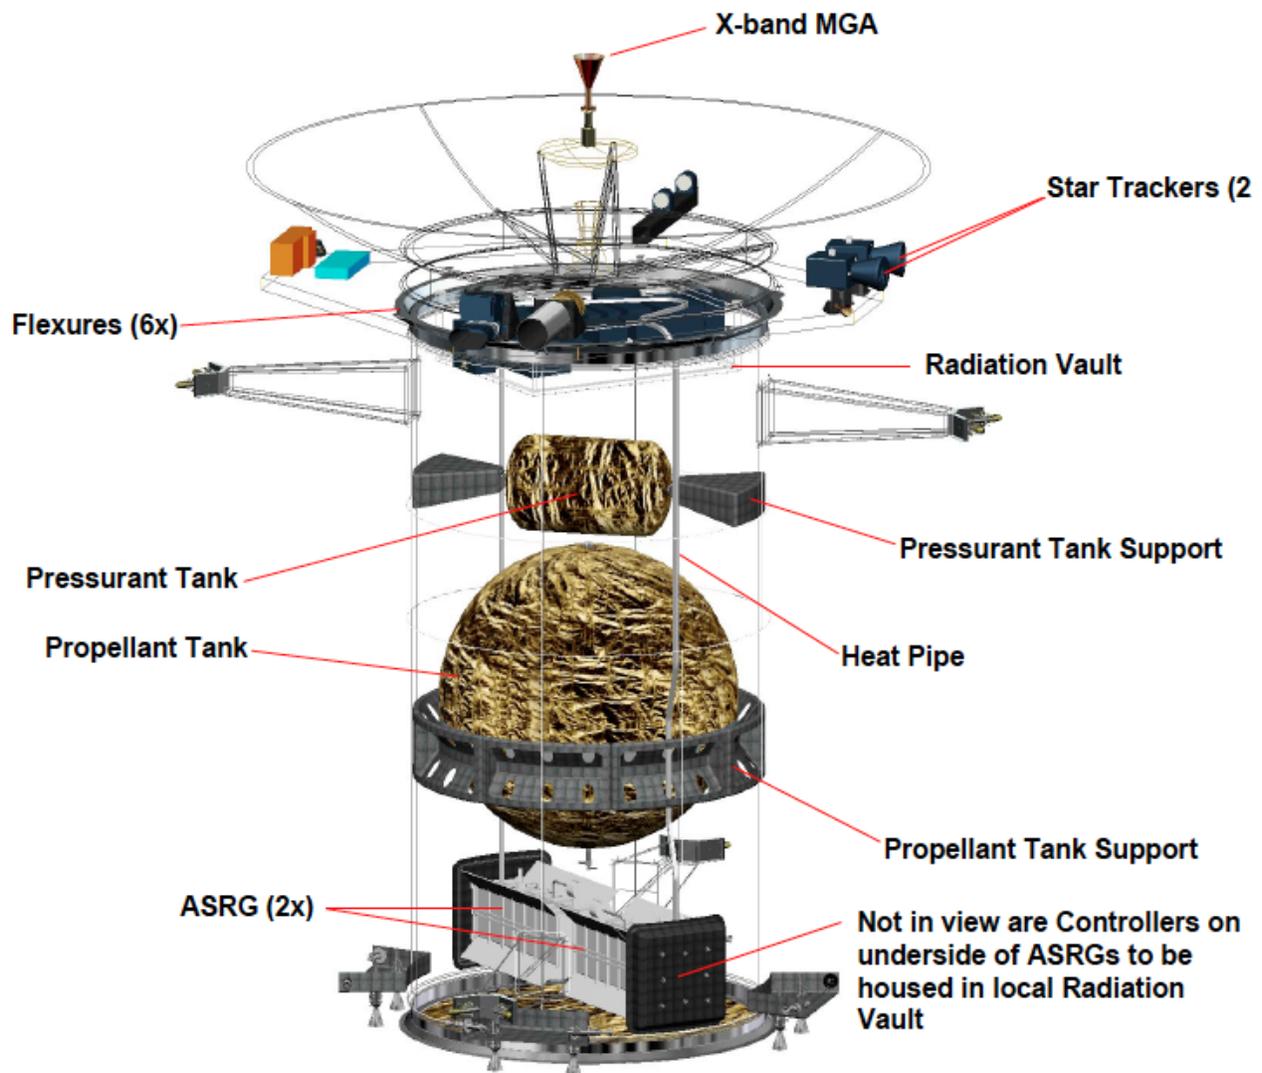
IVO Concept Spacecraft Internal Component Layout (Ref. 9).
